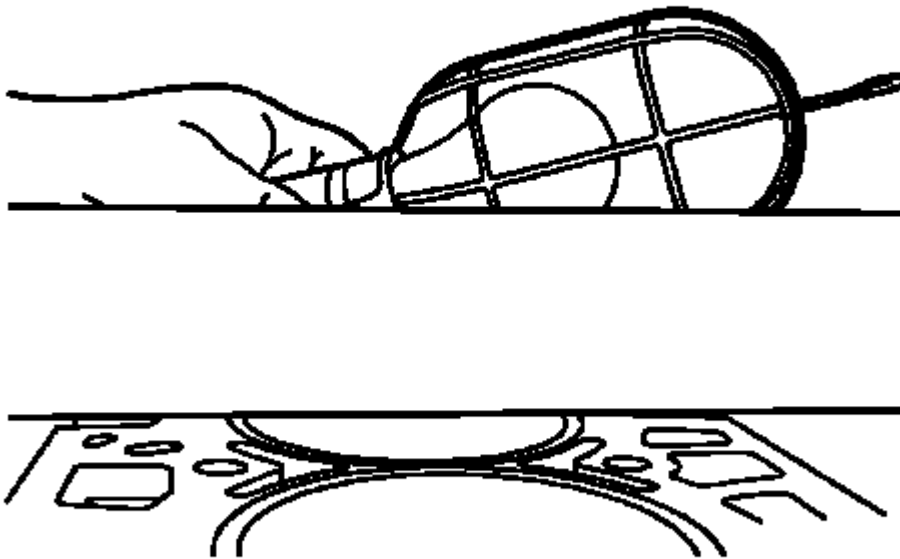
Checking Cylinder Block Deck Surface With Straight Edge
